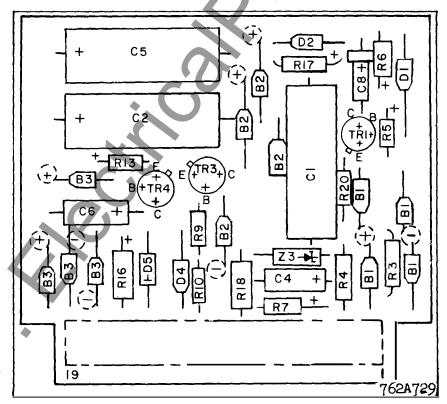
Printed Circuit Assembly for Sensing Circuit in the SD-2 Relay (one phase).
